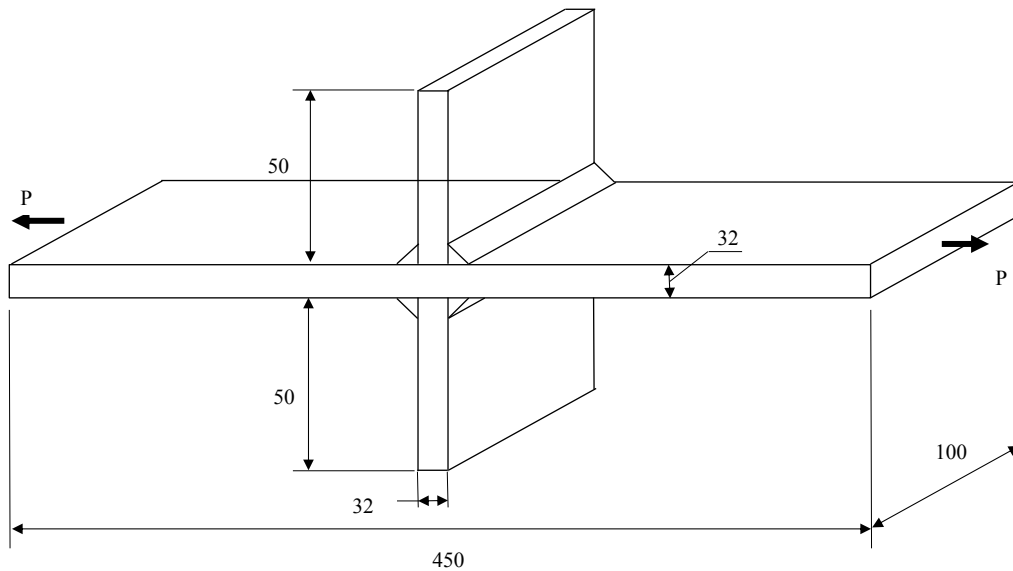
Cruciform welded detail (Engesvik and Moan 1983).
